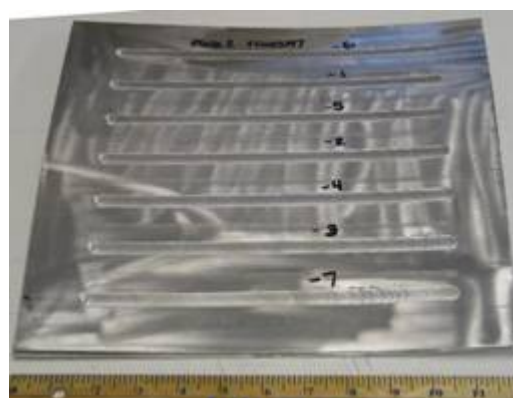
Linear Friction Stir Welded multisheet pack prior to SPF testing. This configuration is designed to produce the “3 sheet with hat stiffener” structure. Alternating linear welds are made from each side of the multisheet pack using a pin that penetrates only through the upper two sheets.
